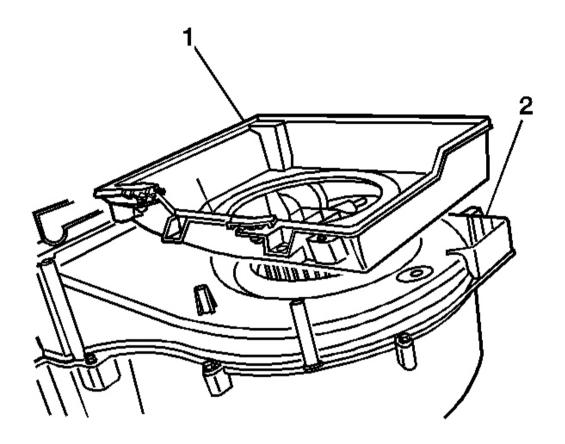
Lower Recirulation Housing Courtesy of GENERAL MOTORS CORP.
